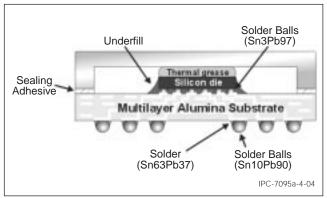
Cross-Section of a Ceramic Ball Grid Array (CBGA) Package
